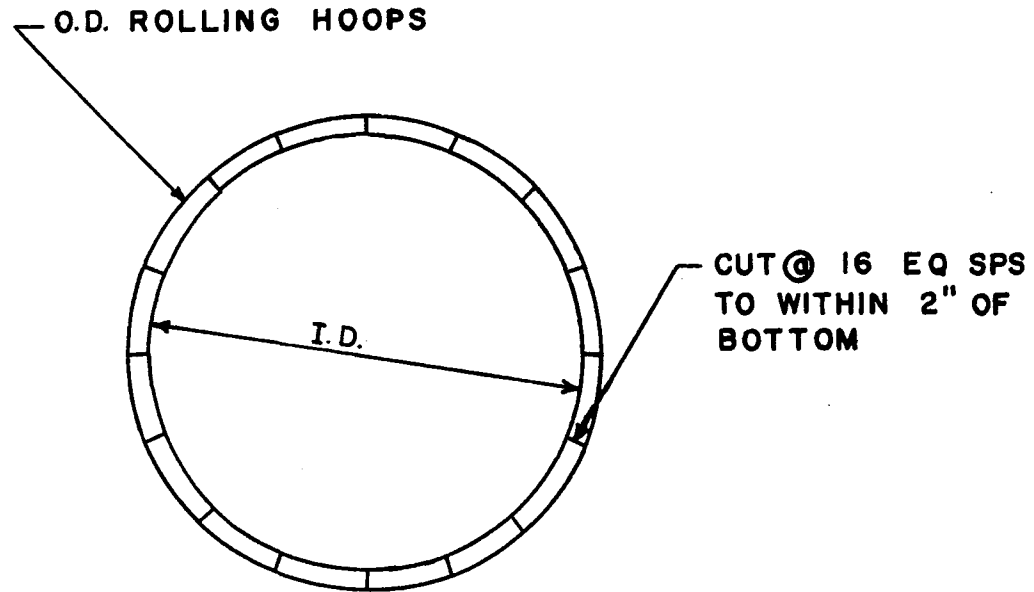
STEEL DRUM SUPPORT DETAILS
